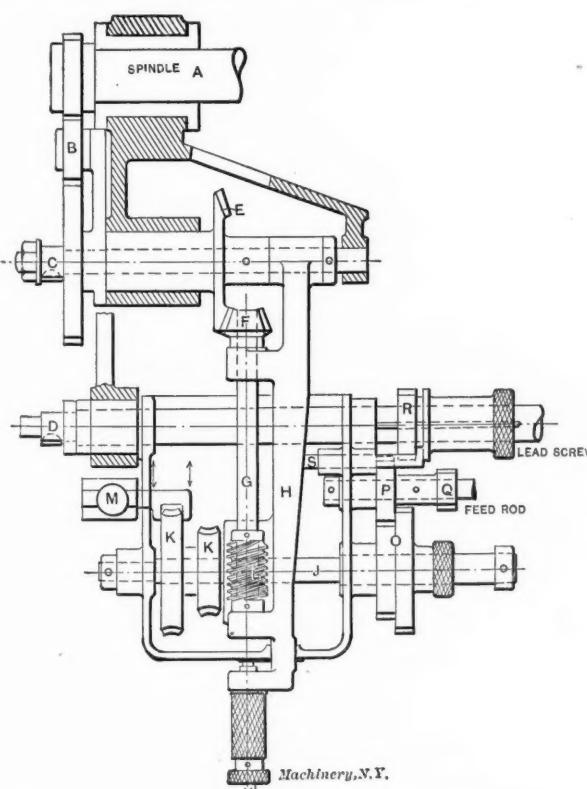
Arrangement of Feed and Screw Cutting Connections for the Cincinnati Lathe.
